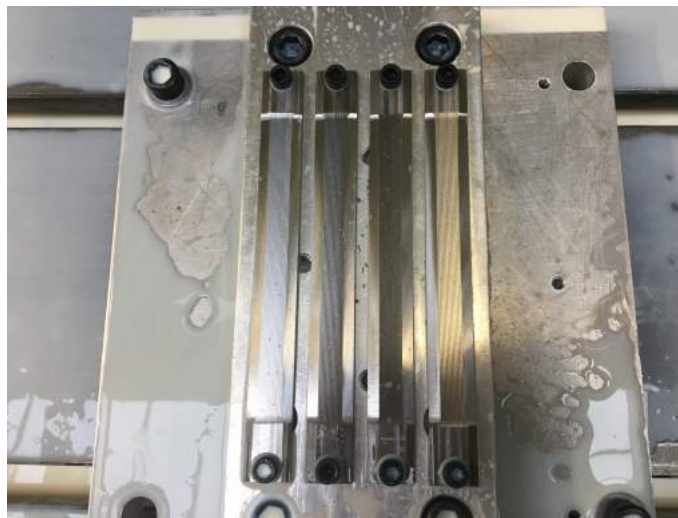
Machining set up for the production of Ti-5553 four point bend fatigue test coupons.
